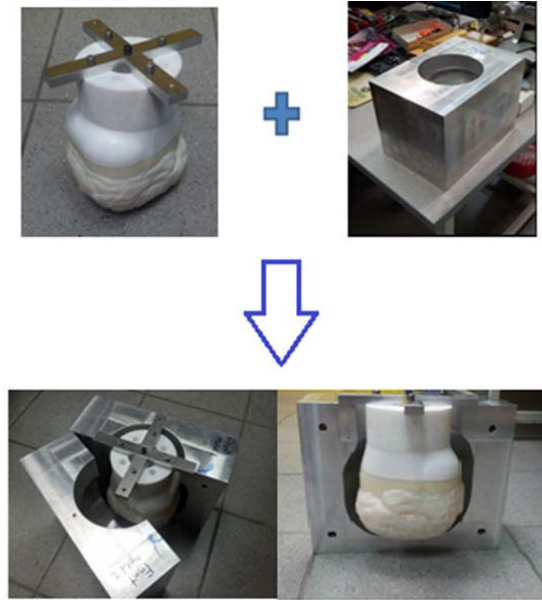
Assembly of the brain master pattern and the aluminium mold.
